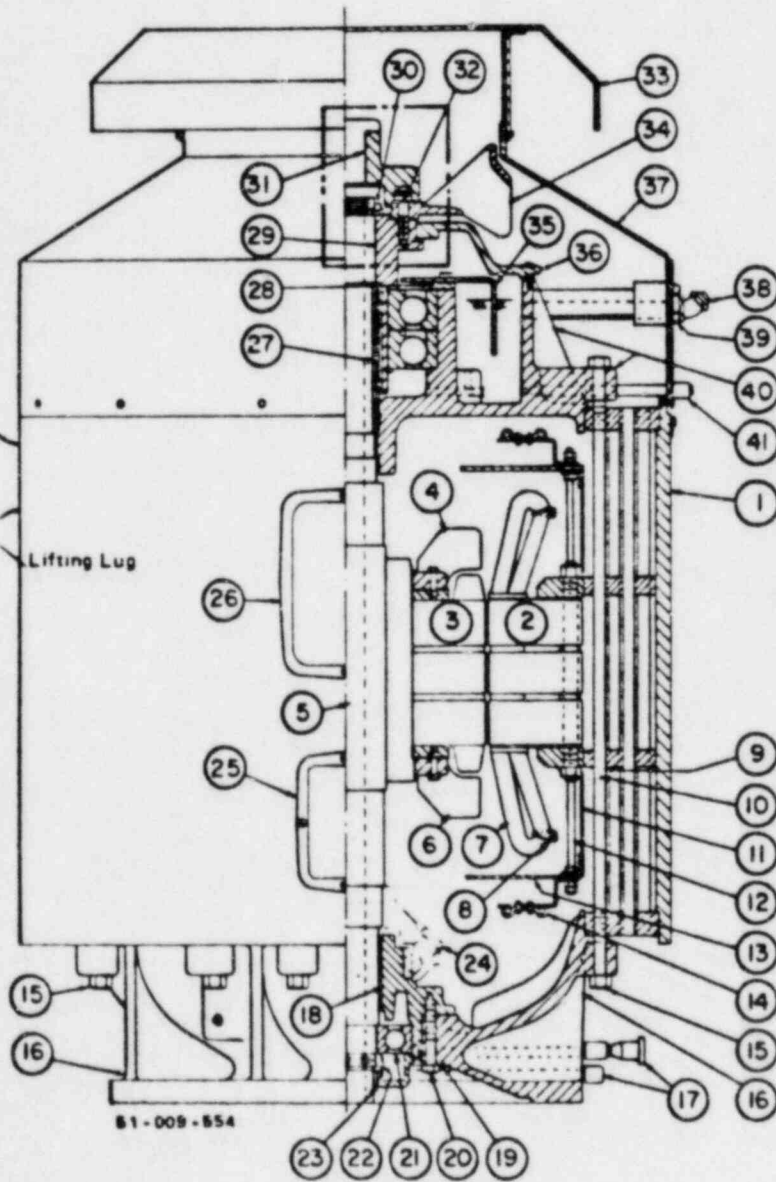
; VERTICAL HOLLOW-SHAFT MOTOR
